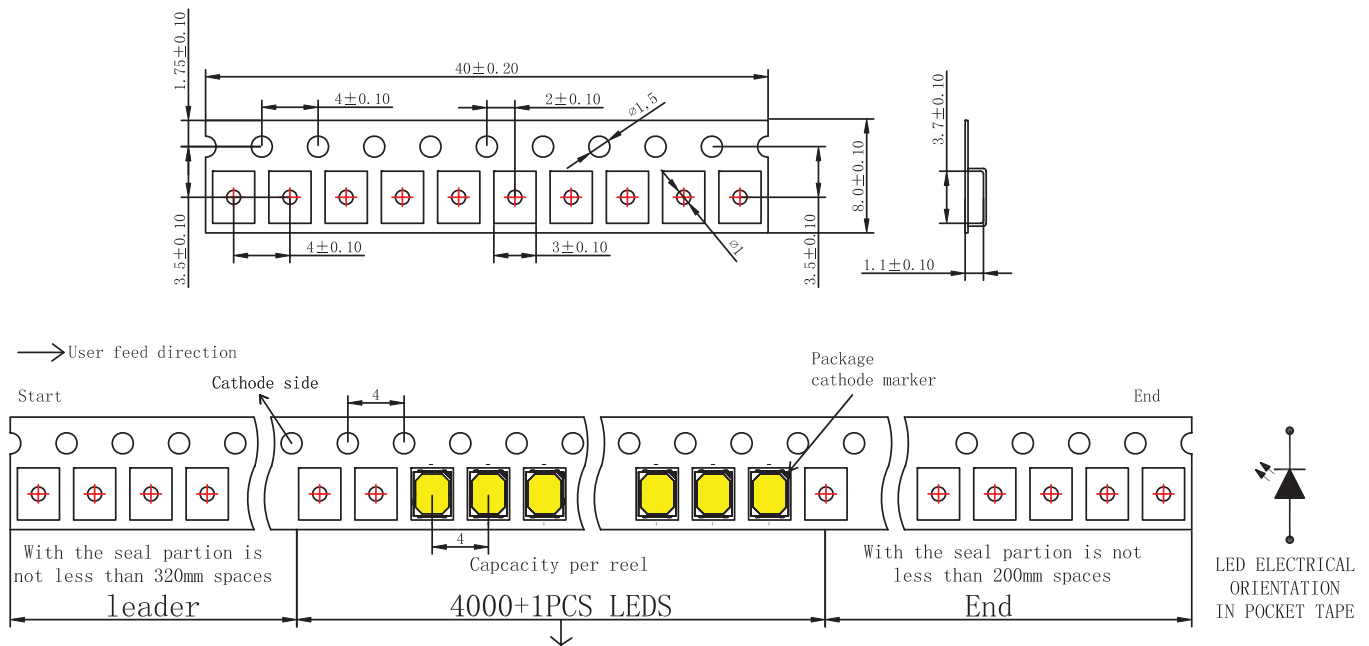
Pocket tape dimensions for LUXEON 2835 Line.
